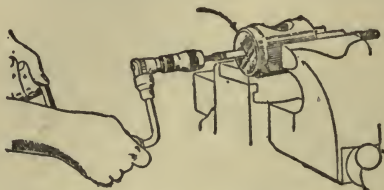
GRINDING VALVE IN DETACHABLE SEAT
